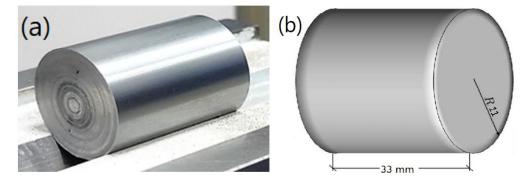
(a) The workpiece (final sample), (b) 3D schematic object.
